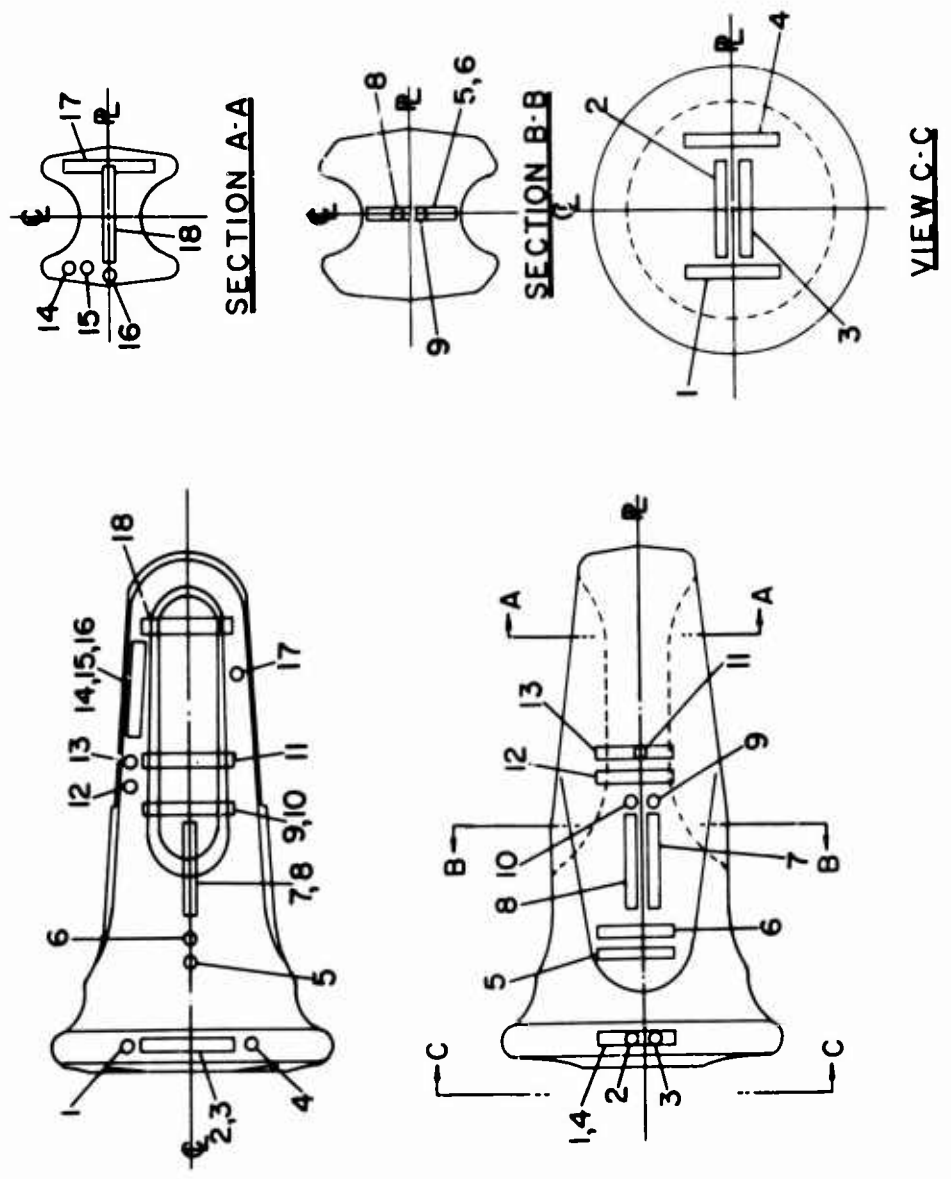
Location of Tensile Specimens in Sectioned Ti-13V-11Cr-3Al Cuff Forging.
